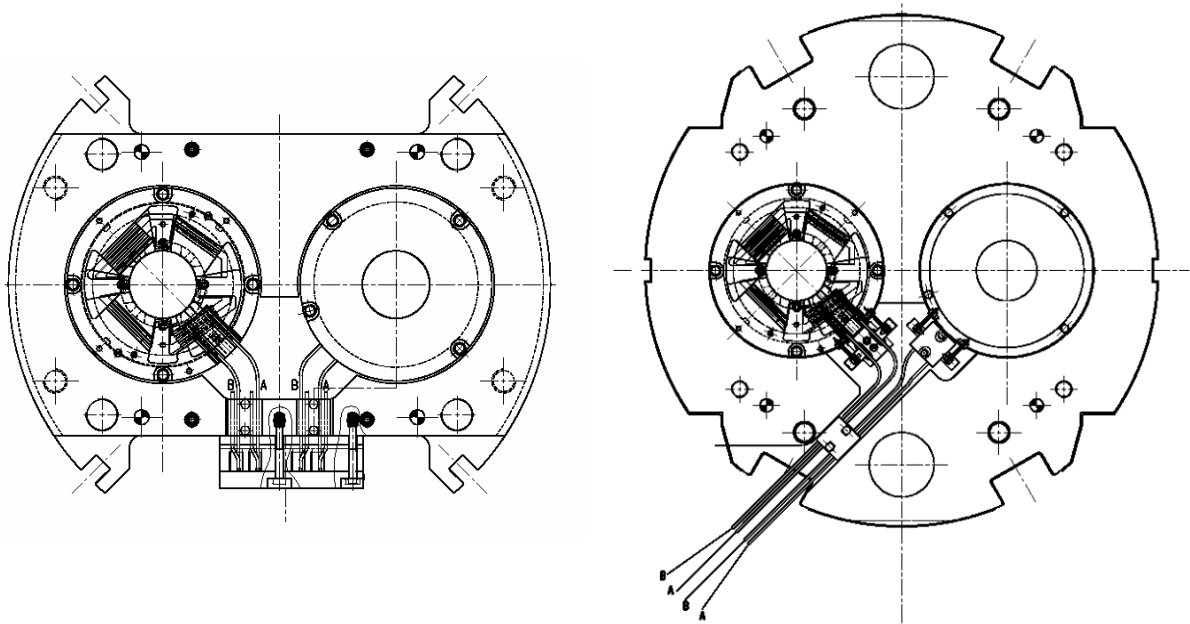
MQTLH cross-section (left) and MQTLI cross-section (right).
